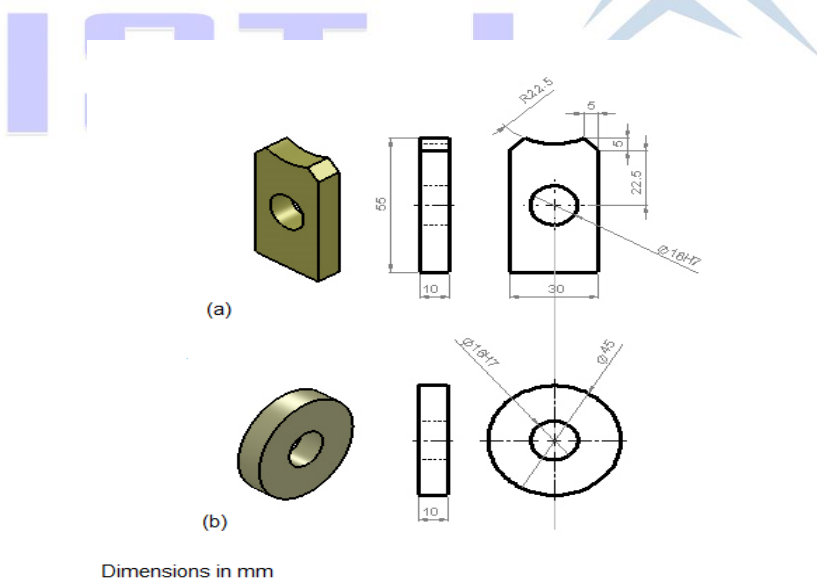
Wear test work pieces (a) block specimen, (b) ring specimen
